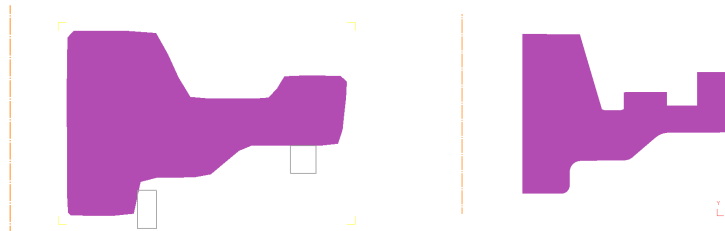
Left - as forged disk geometry. Right - as machined disk geometry.
